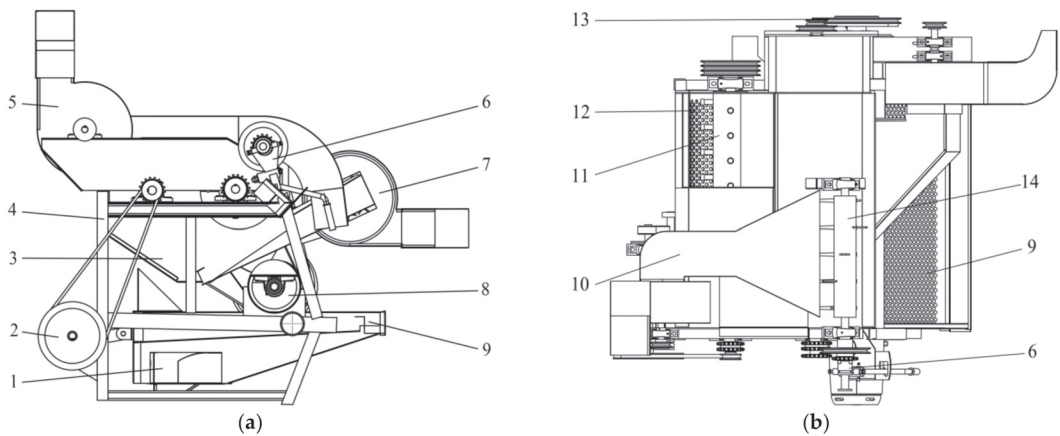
Structural scheme of threshing device. 1. kernel discharge port 2. Crank drive wheel 3. Inclined guide plate 4. Frame 5. Front fan 6. Clutch adjustment device 7. Rear fan 8. Core discharging device 9. Vibrating sieve 10. Front fan air supply channel 11. Threshing roller 12. Concave plate screen 13. Drive wheel 14. Spiral impurity removal device. (a) Main view, (b) Top view.
